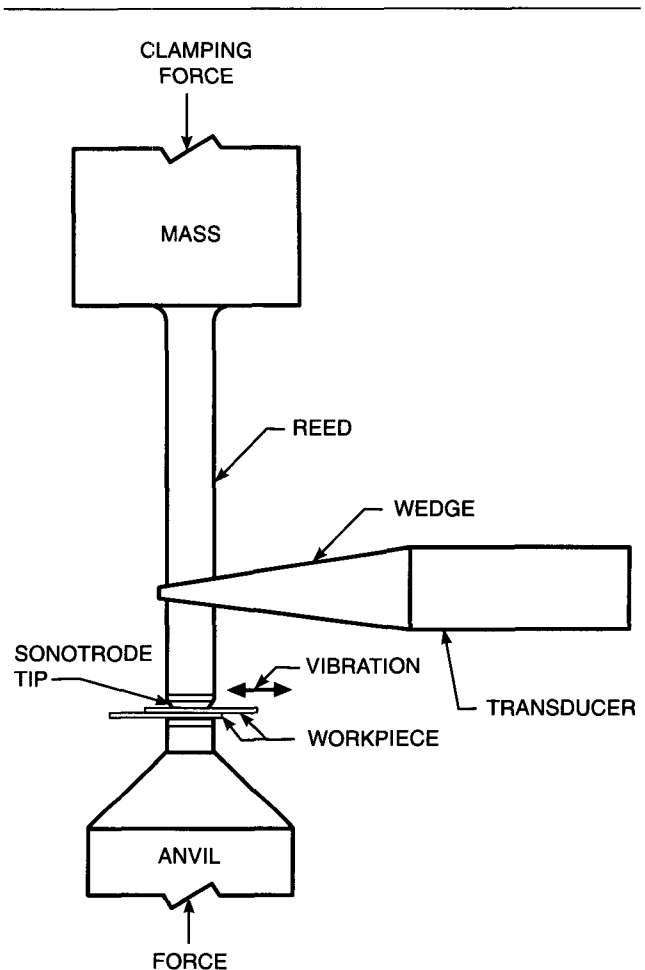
Wedge-Reed Ultrasonic Spot Welding System
